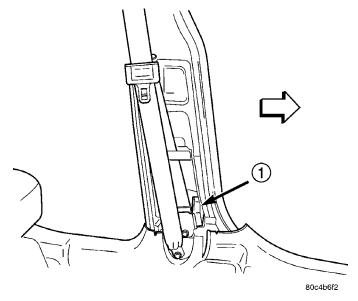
SEAT BELT TENSIONER LOCATION -TYPICAL
